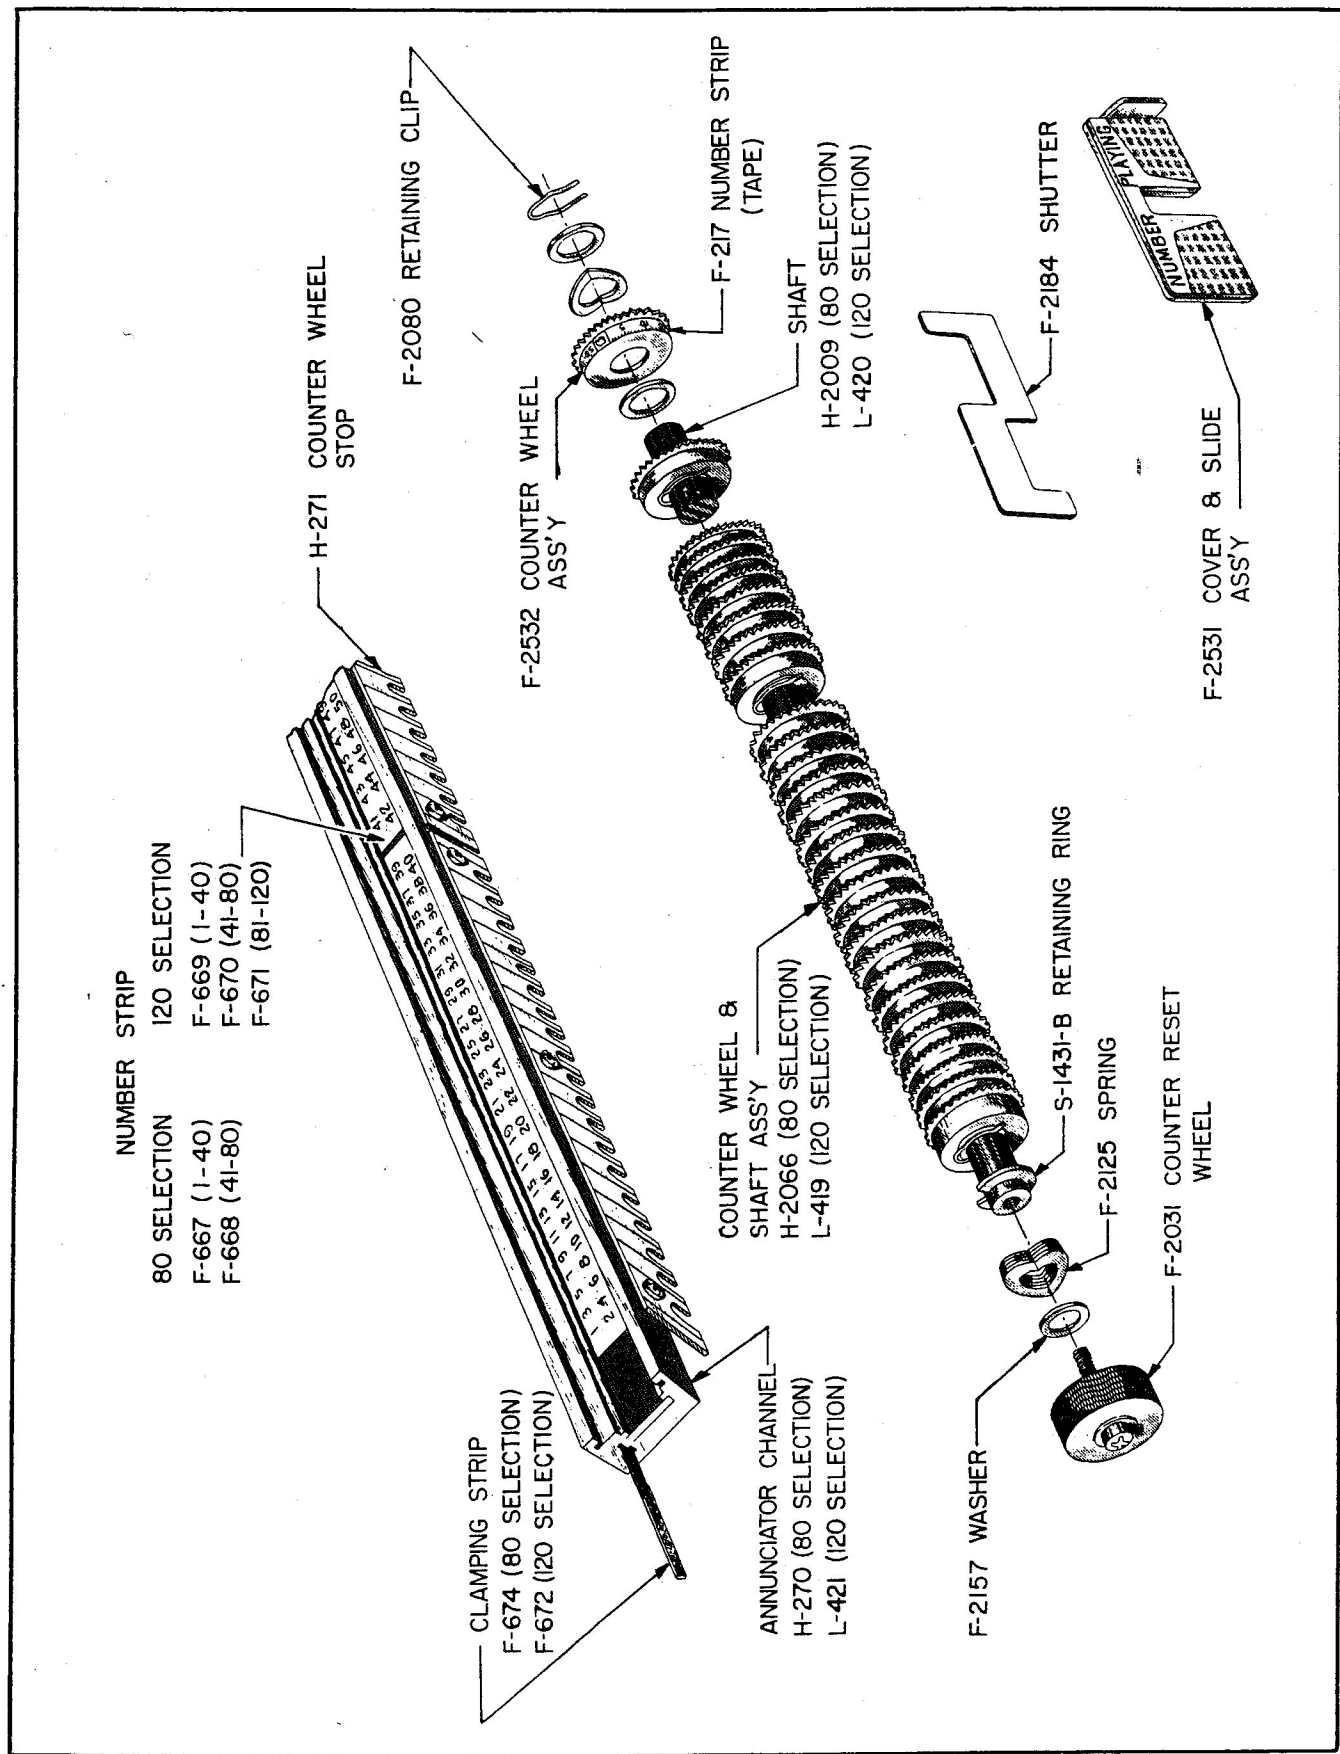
ANNUNCIATOR AND RECORD COUNTER PARTS GROUP
